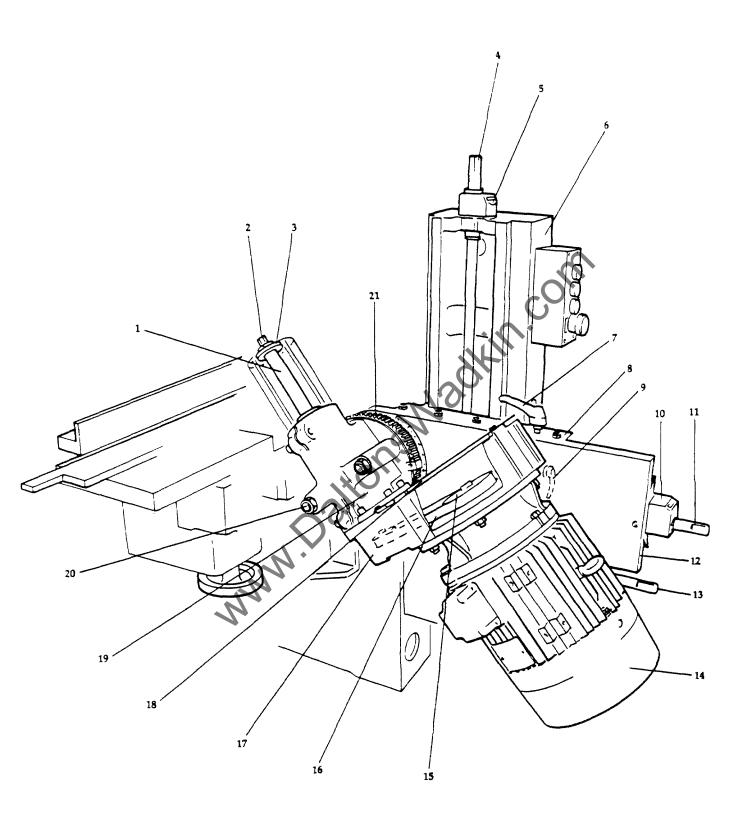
MOUNTING FOR TOP PAD OR ROLLER PRESSURE UNIT BEFORE TOP HEAD
